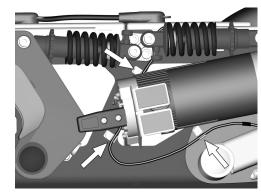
The cable is assembled with three cable brackets on the left and right hand side of the chassis.
